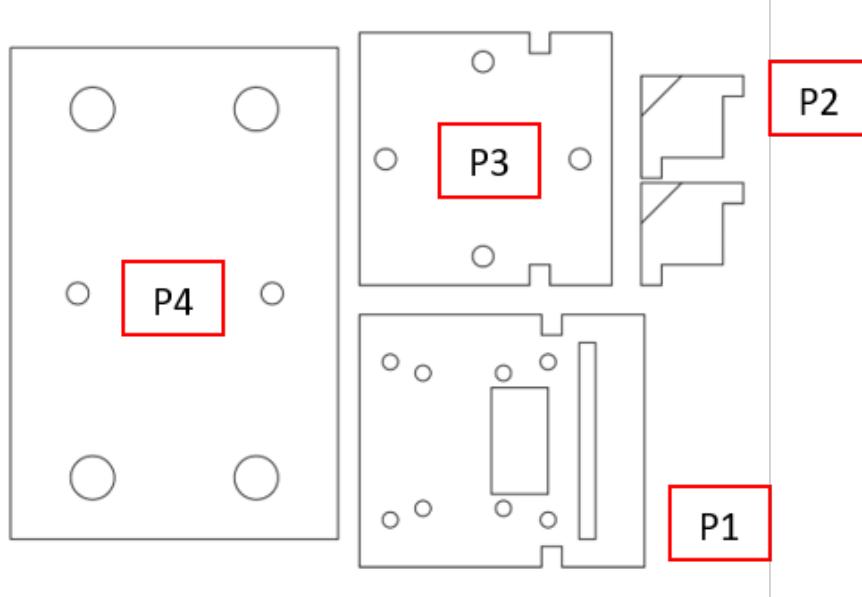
Laser-cut parts for building the camera mount in Fig. 2.
